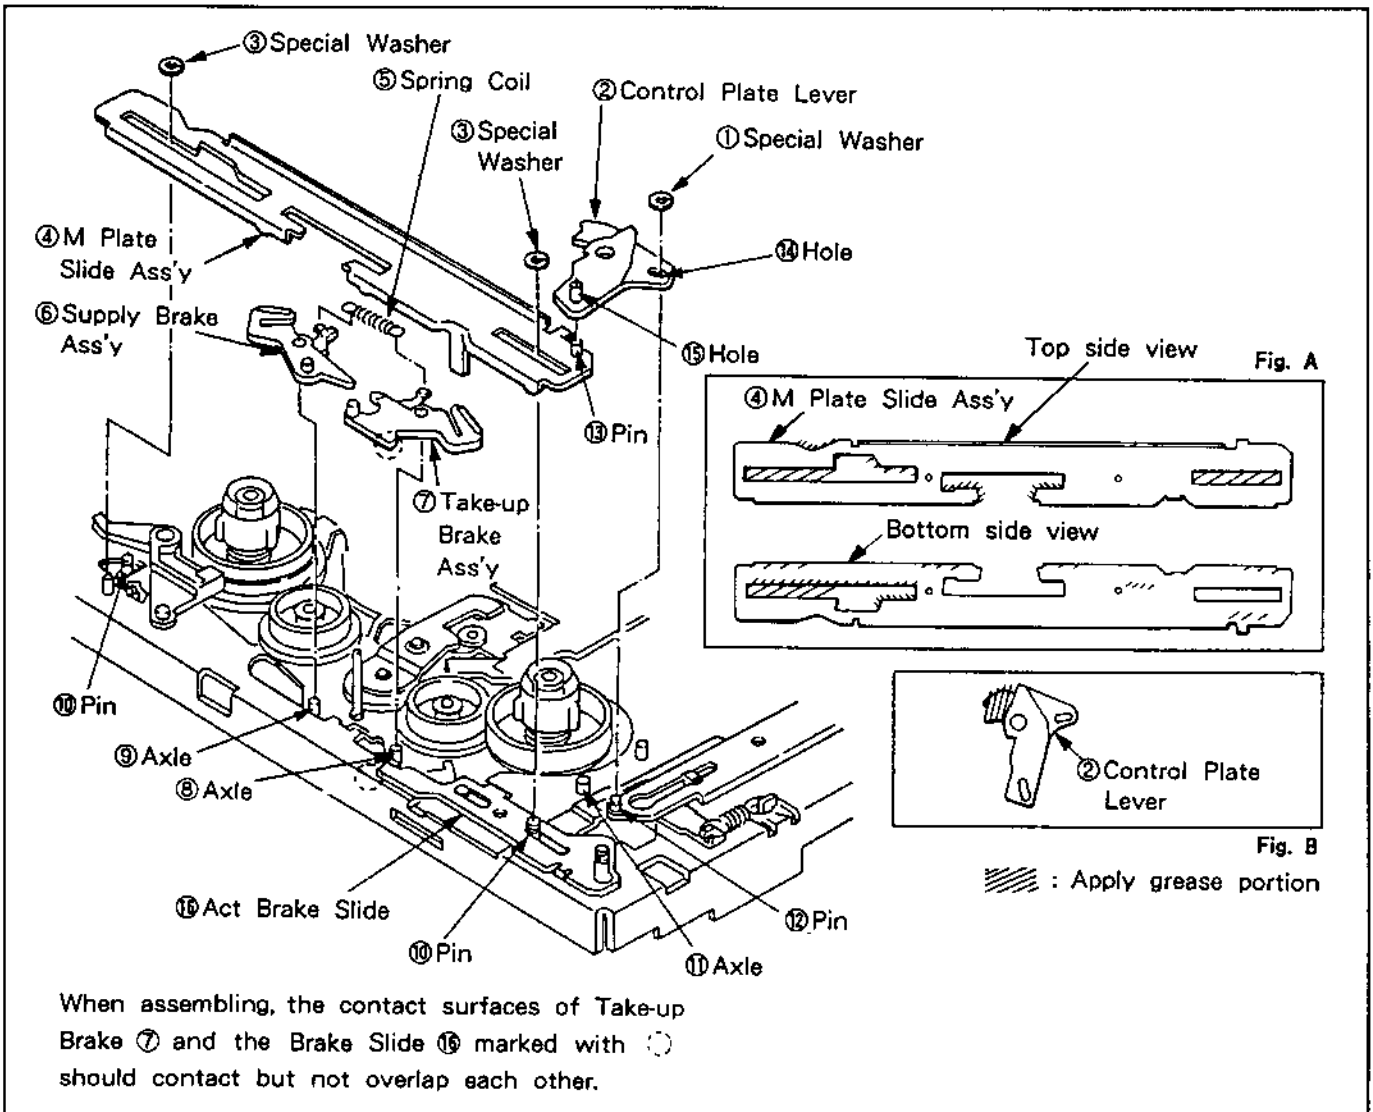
Supply Brake Ass'y & Take-up Brake Ass'y
